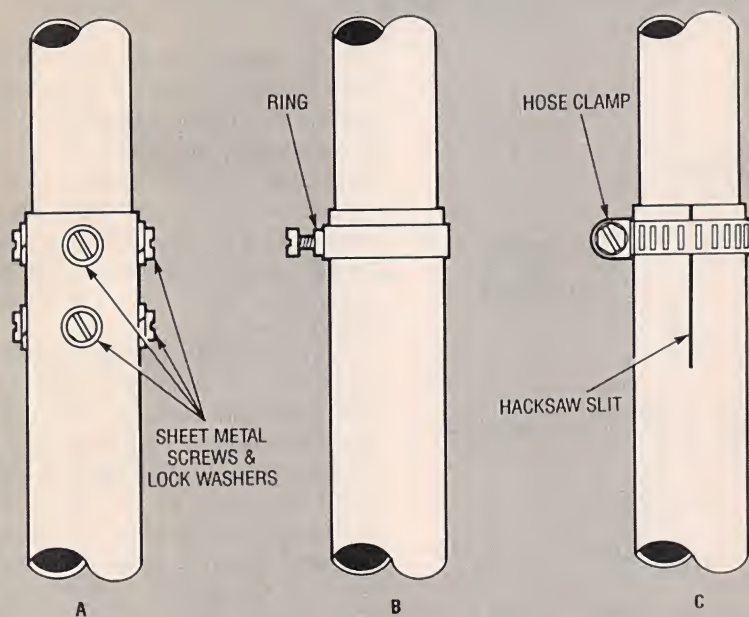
Putting two pieces of pipe or tubing together is one thing, keeping them together is quite another. Several approaches can be used to secure a joint: in A, several sets of sheet metal screws are used; in B a ring collar with a set screw is used; and in C an automotive hose clamp keeps the joint secure.
